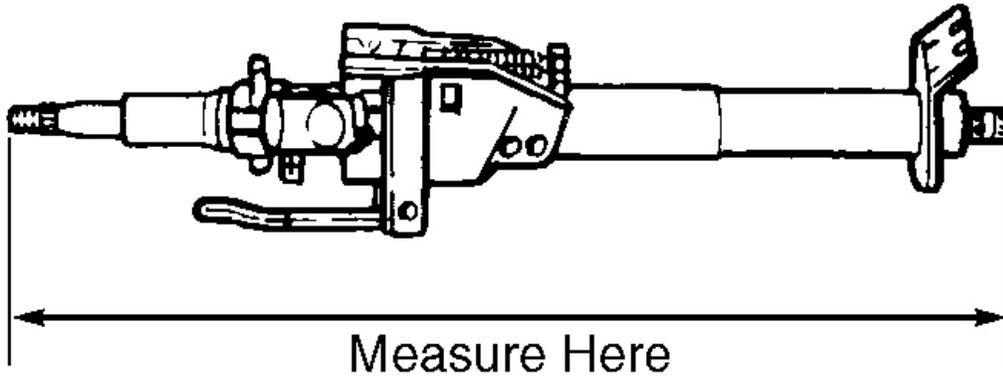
Measuring Steering Shaft Dimensions (Millenia)
